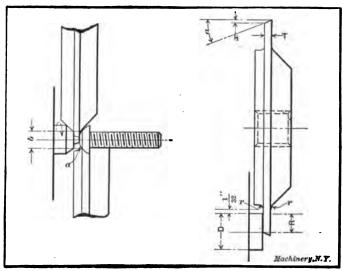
Spherical Screw Head formed by Combination of Forming and Cut-off Tools
